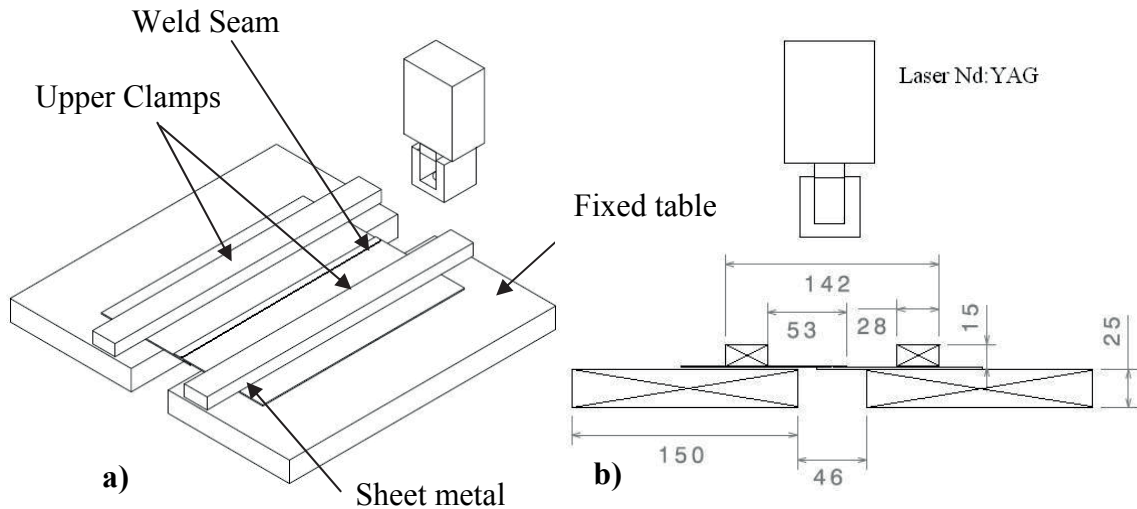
2 Clamping system during laser welding a) isometric view, b) front view (mm)
